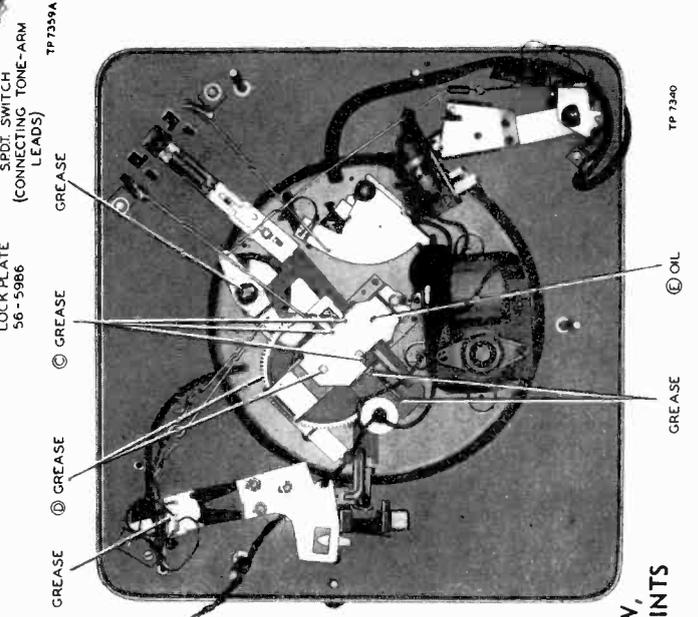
TOP VIEW, SHOWING LUBRICATION POINTS
